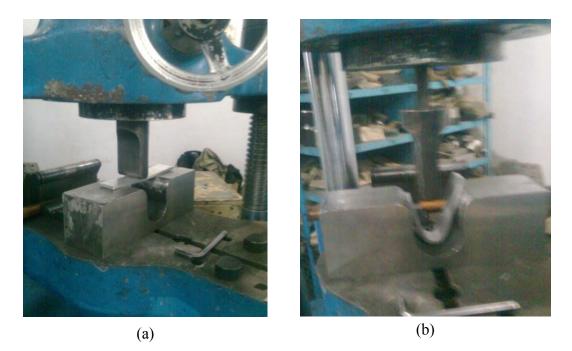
Experimental set up for the Bend test (a) Before Bend test (b) After Bend test
